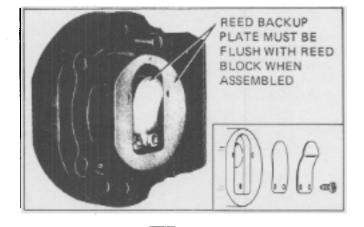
When reassembling reed plate and reed backup to carburetor mount assembly the curved portion MUST BE installed as shown.
